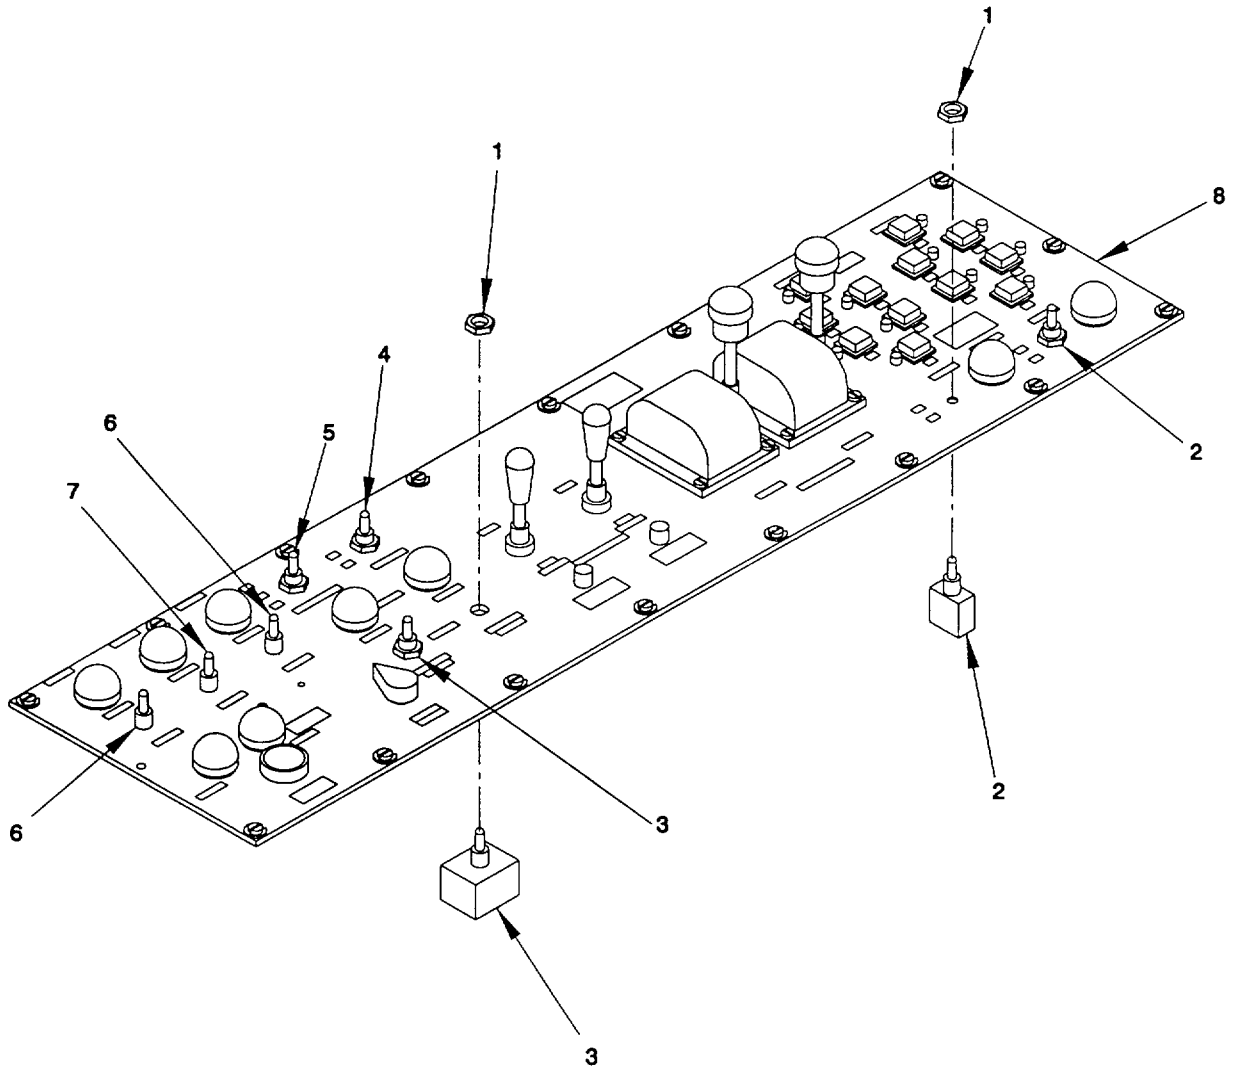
Toggle Switches, Lower Control Panel "A2", Remove/Install.
